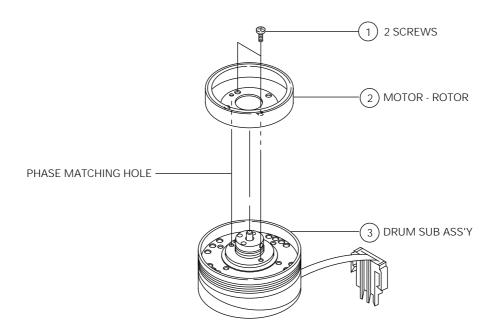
Assembly of Motor Rotor and Cylinder Sub Ass'y
